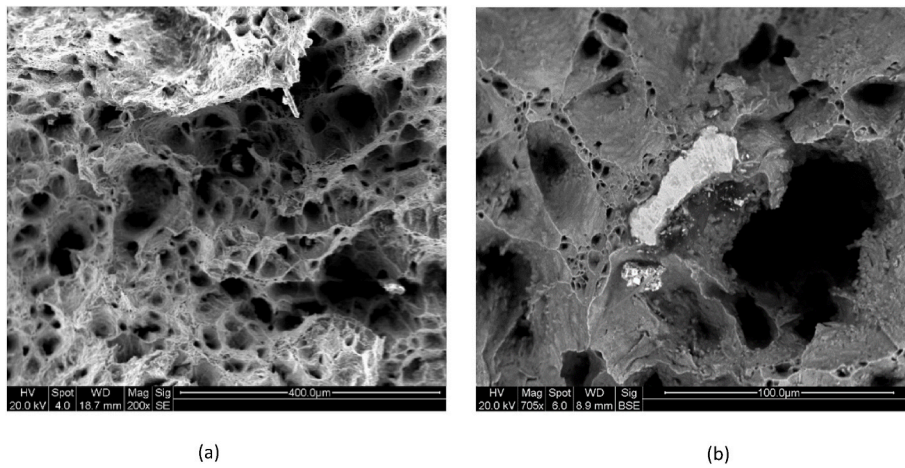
SEM images of fracture surfaces following Test 4, (a) SE showing dimples with some containing inclusions, and (b) BSE showing detail of MnS inclusion (bright area)
